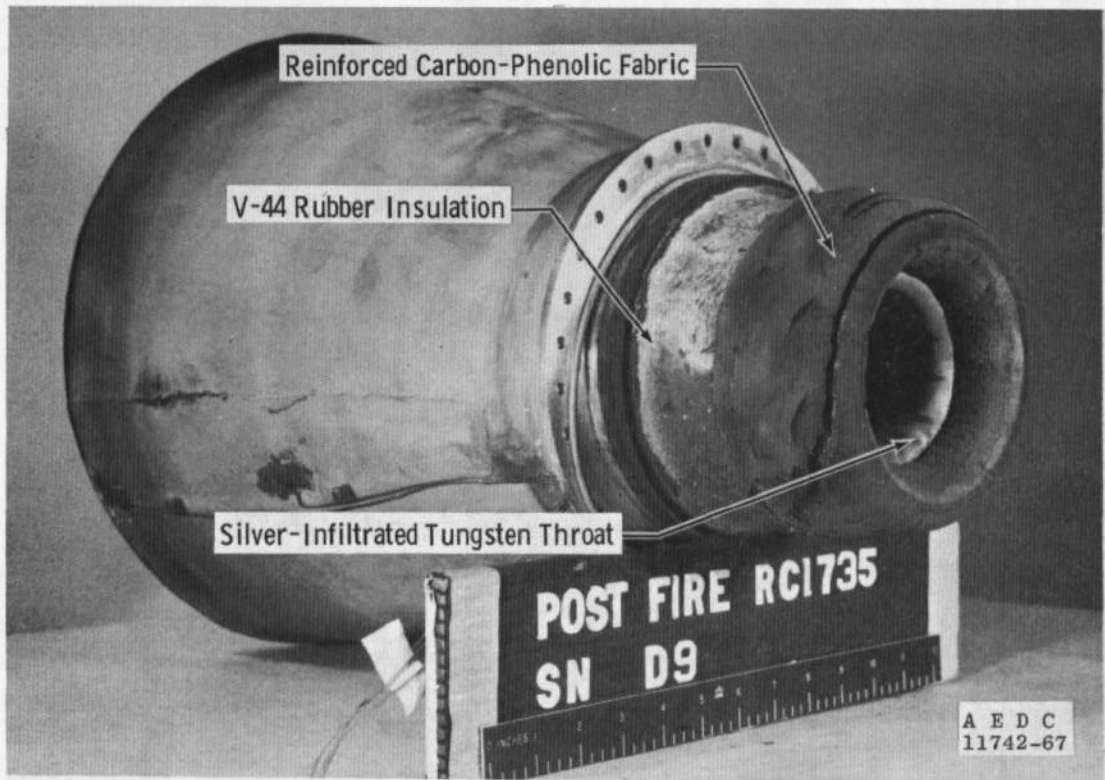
Post-Fire Photographs of the Nozzle Assembly
